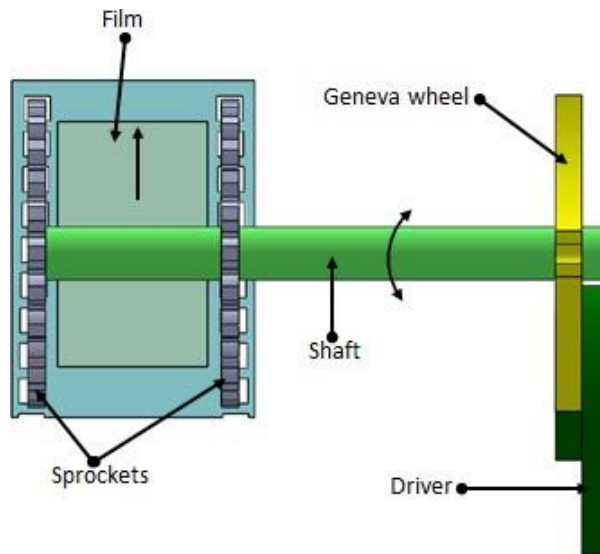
Motion picture projector with Geneva mechanism
